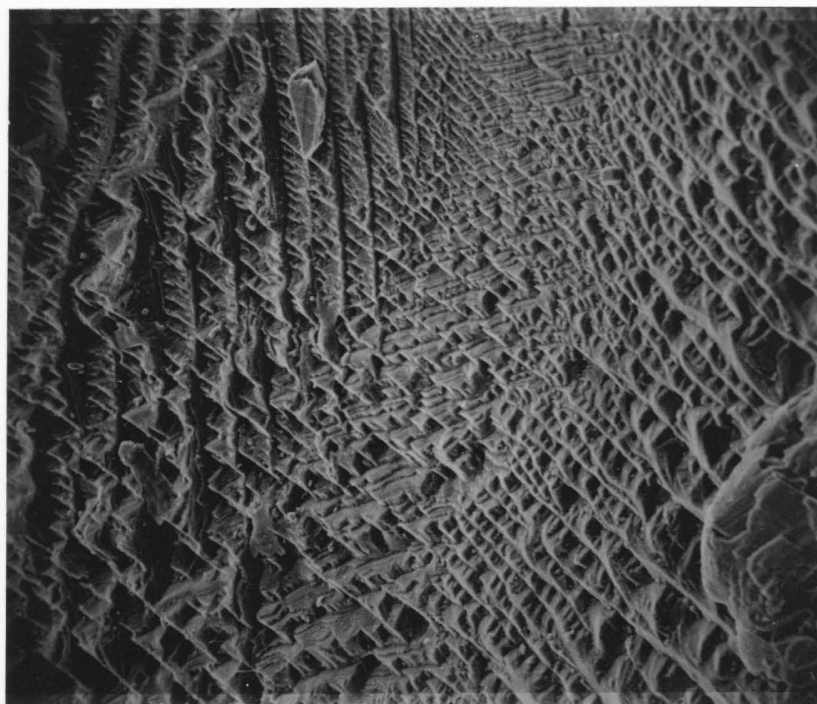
Fracture surface in Figure 18 enlarged to show cleavage, fracture, and etching features.
